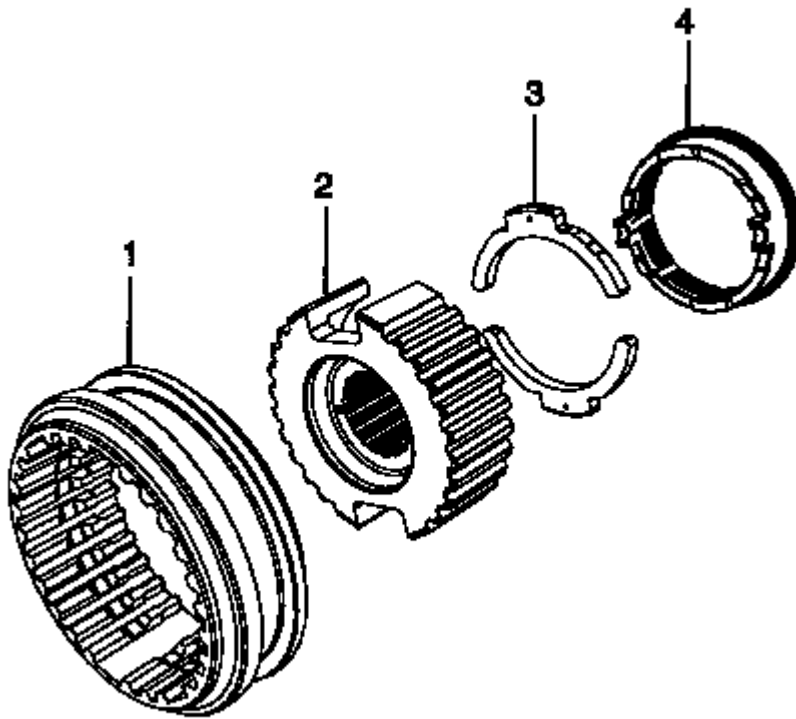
Exploded View Of 5th Gear Synchronizer Hub Assembly
